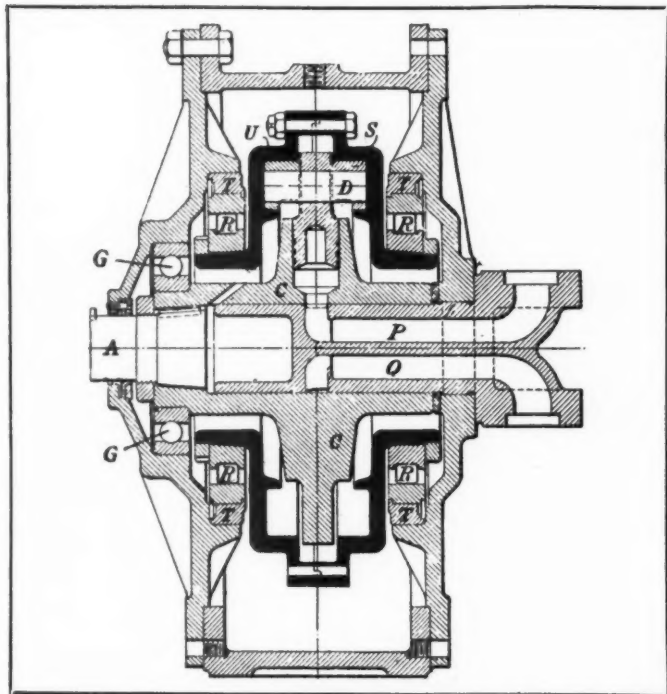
Axial cross-section of a Hele-Shaw rotary pump as applied to the driving of motor trucks
